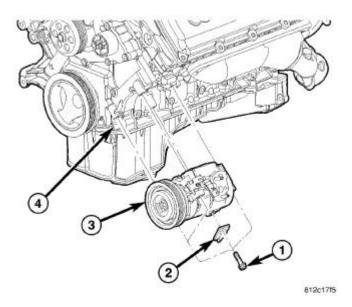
A/C COMPRESSOR REMOVAL/INSTALLATION Courtesy of CHRYSLER LLC
